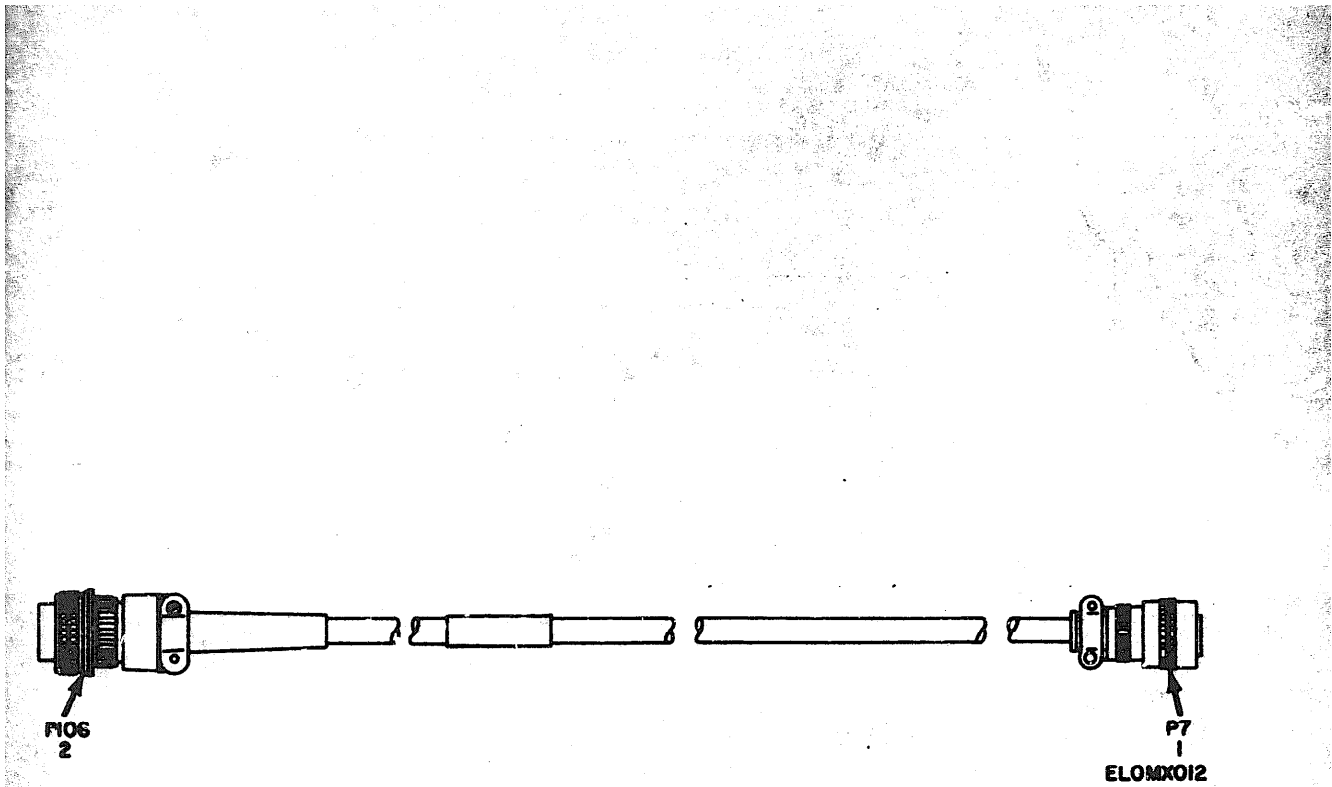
Cable Assembly, Special Purpose, Electrical, CX-7568/ASM-63 998942-01-01 (W9).
